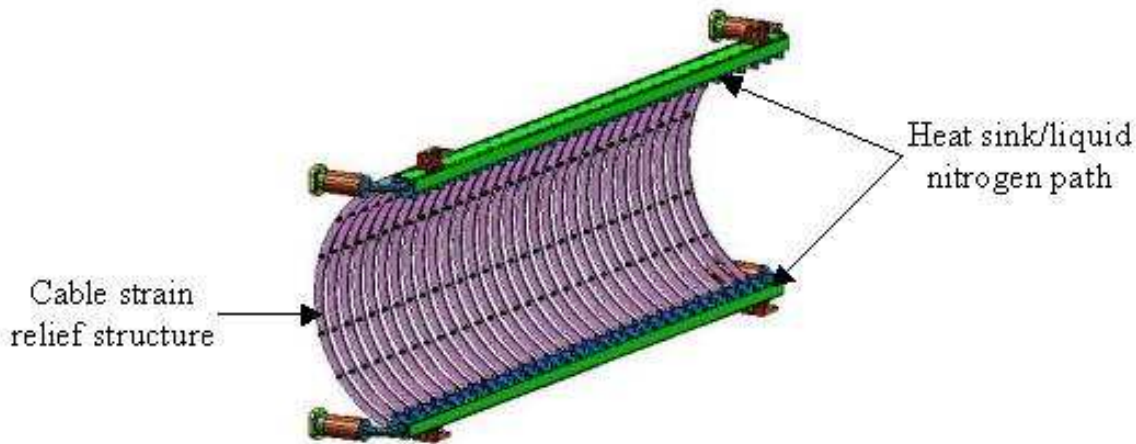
Drawing showing the cold block inside the vacuum vessel.
